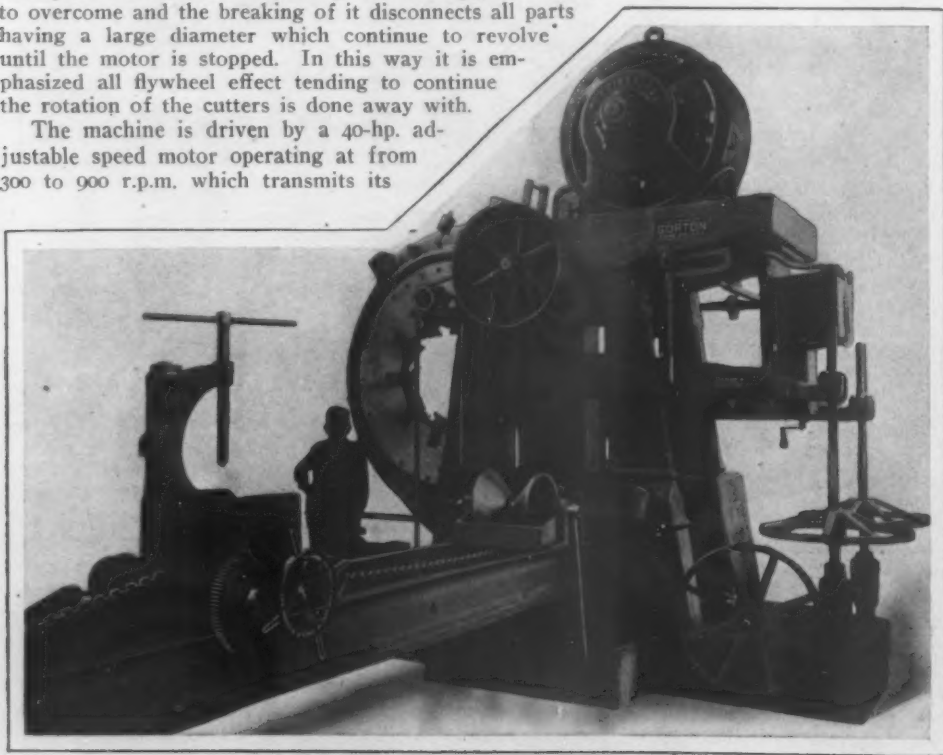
Front View Showing the Drum Raised for Access to the Cutters of the No. 2-C 16-In. Cutting-off Machine Built by the George Gorton Machine Company, Racine, Wis.
